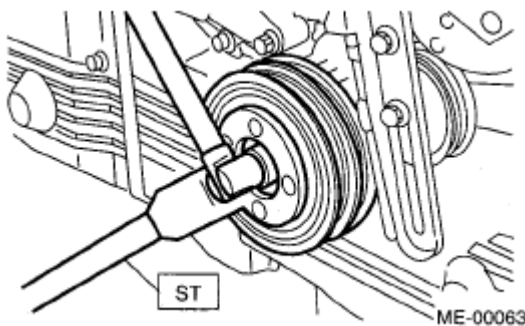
Locking Crank Pulley Using Crank Pulley Wrench 499977100
